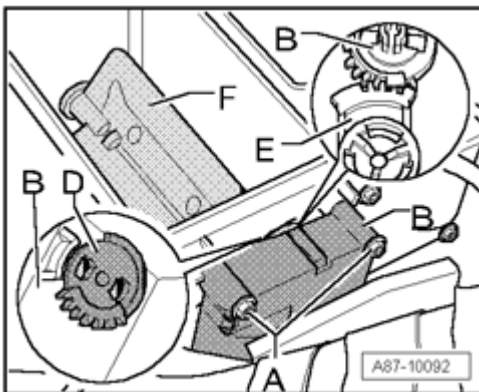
Identifying Bolts, Control Motor, And Connecting Element
